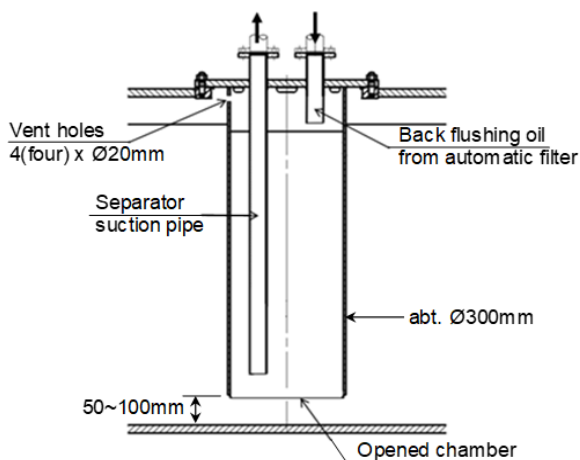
Example of "back-flushing drain tank, Detail A"
